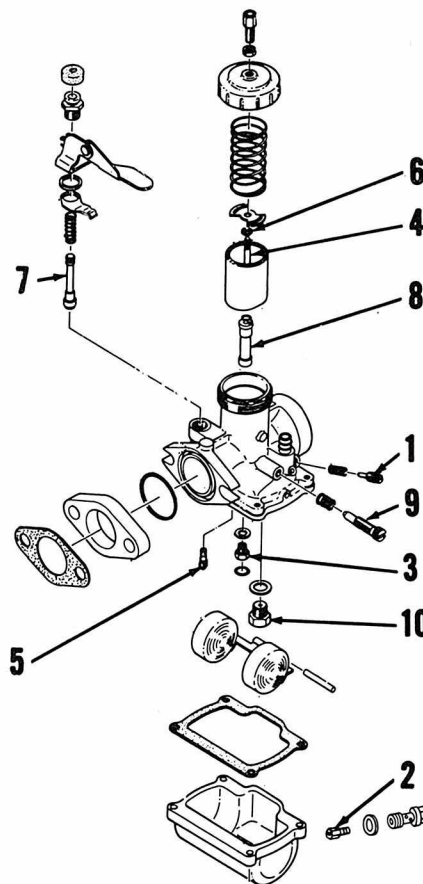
Exploded view of typical carburetor used on AT-1 and CT-1 models.
